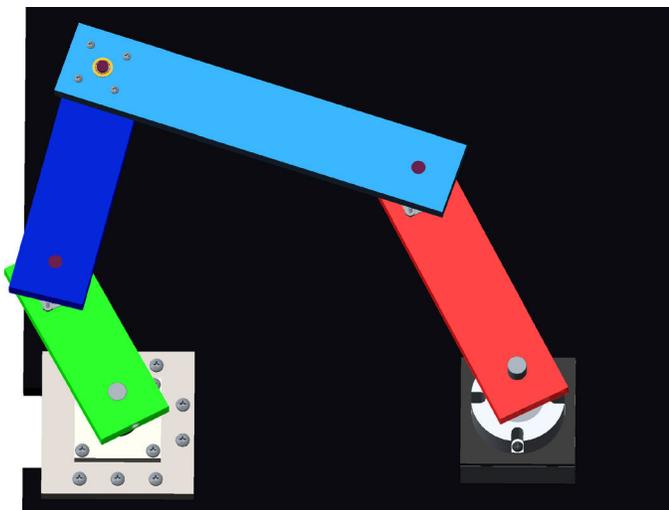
RMG: CAD and PROTOTYPE (view 1).
